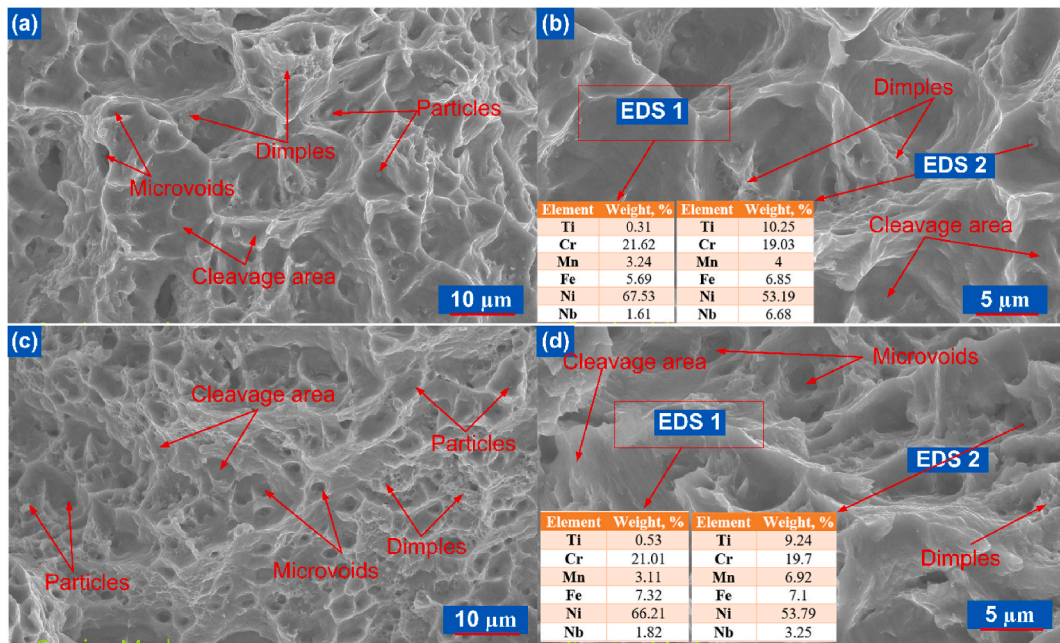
FESEM image of fractured impact tested specimen for VG welded joints with a notch in capping pass; (a, b) AW, (c, d) PWHT.
